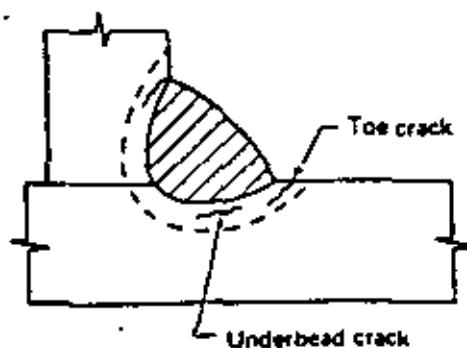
Underbead cracking and toe cracks caused by hydrogen pickup in heat-affected zone of plate
